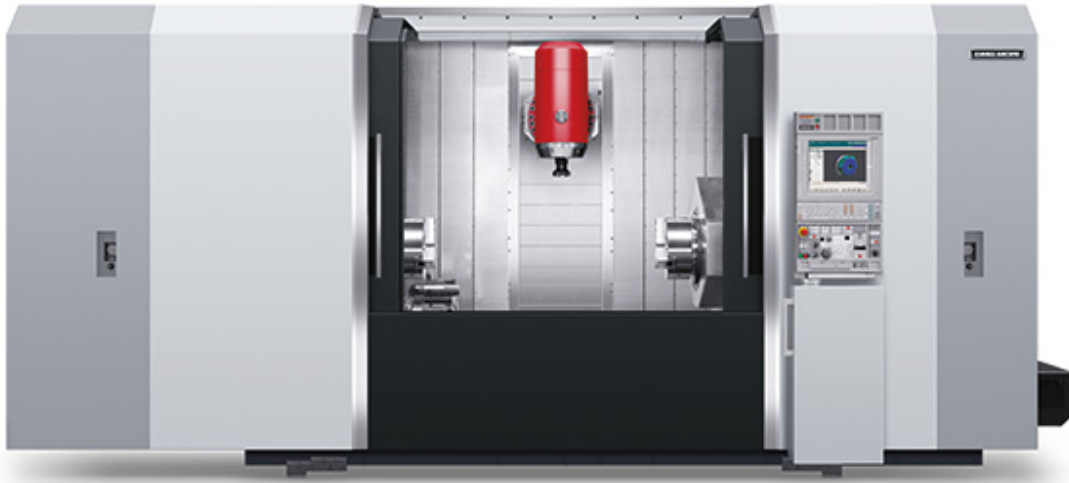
Image showing DMG Mori NT 5400 mill-turn machining centre.
